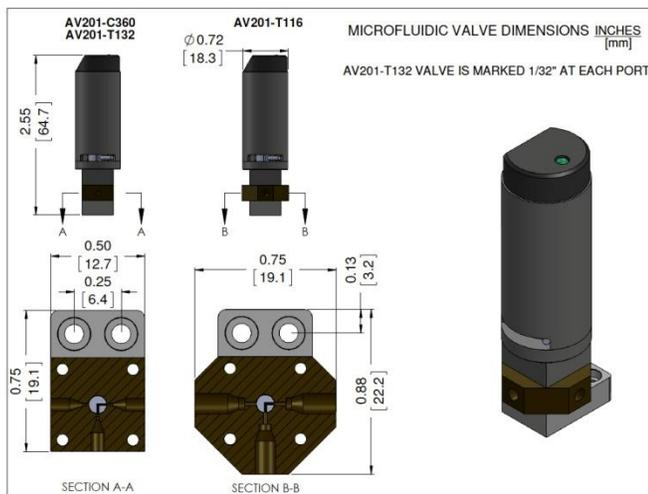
AV201 series and AV202-C360 valve dimensions.
